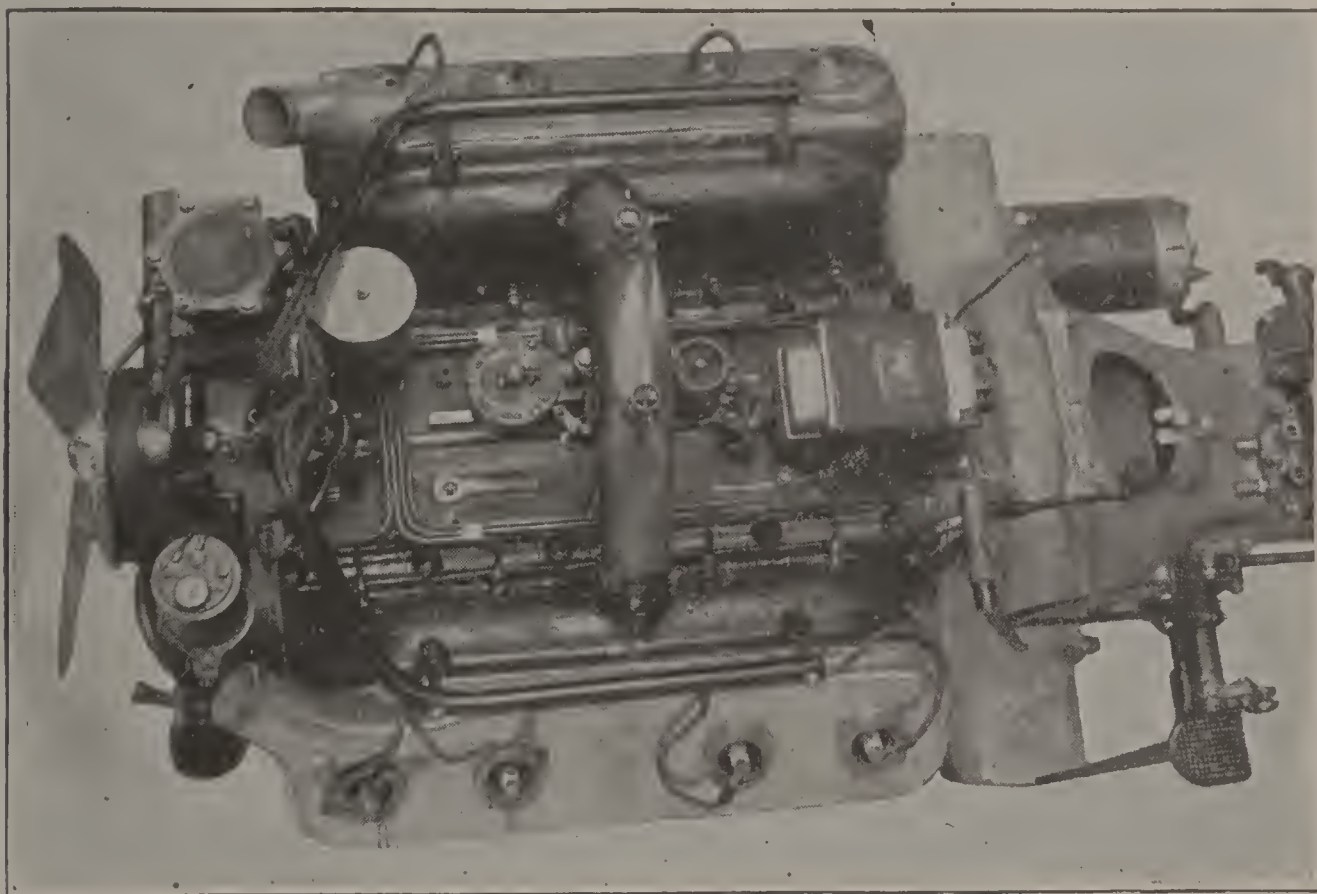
Overhead View of Stearns-Knight Eight-Cylinder Sleeve-Valve Motor
